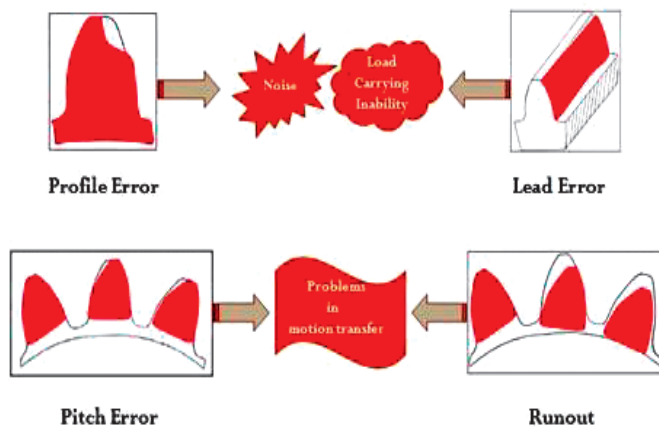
Effects of micro geometry errors on the performance of miniature gear [80]
